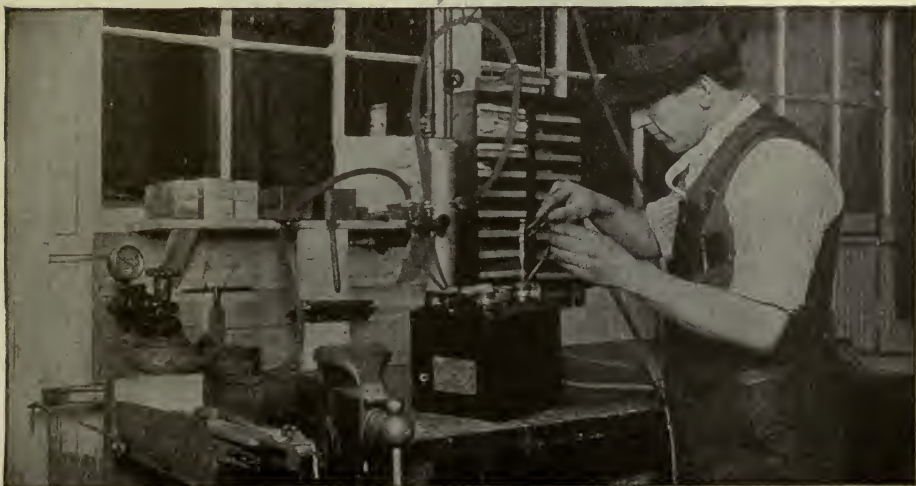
Oxweld lead-burning equipment using oxygen and city gas—welding battery terminal straps.
